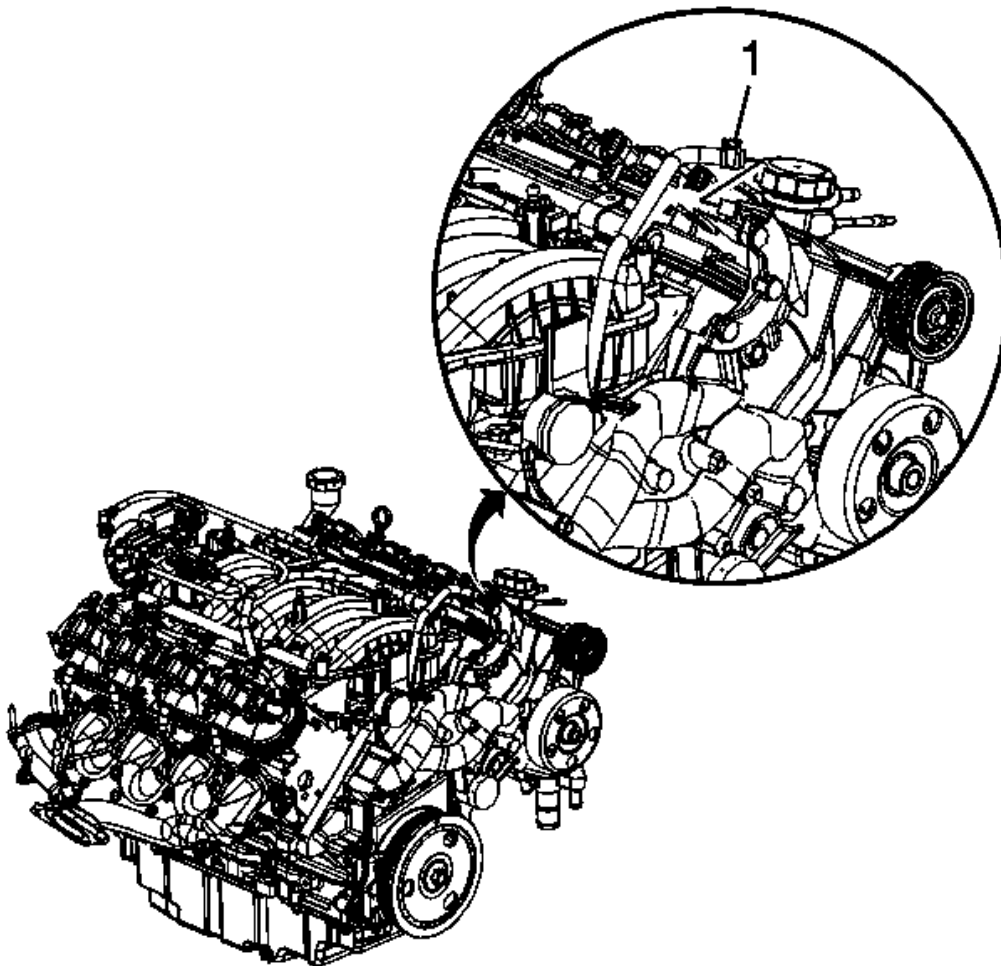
Engine Coolant Air Bleed Hose And Clamp
